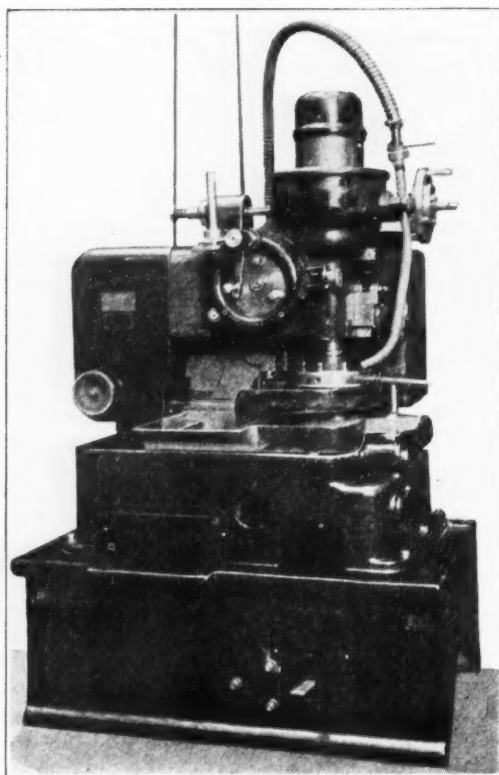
Front view of high-speed gear shaper arranged for side-trimming direct-drive internal clutch gears
